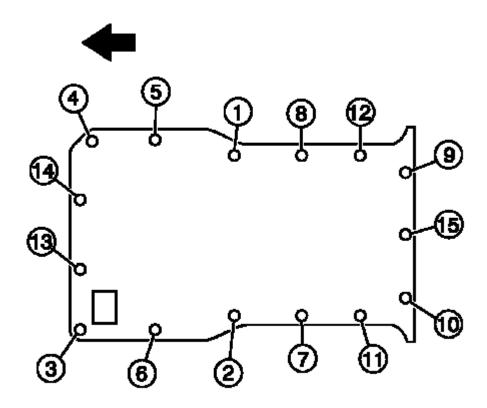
Oil Pan Bolts Removal & Tightening Sequence Courtesy of GENERAL MOTORS COMPANY
